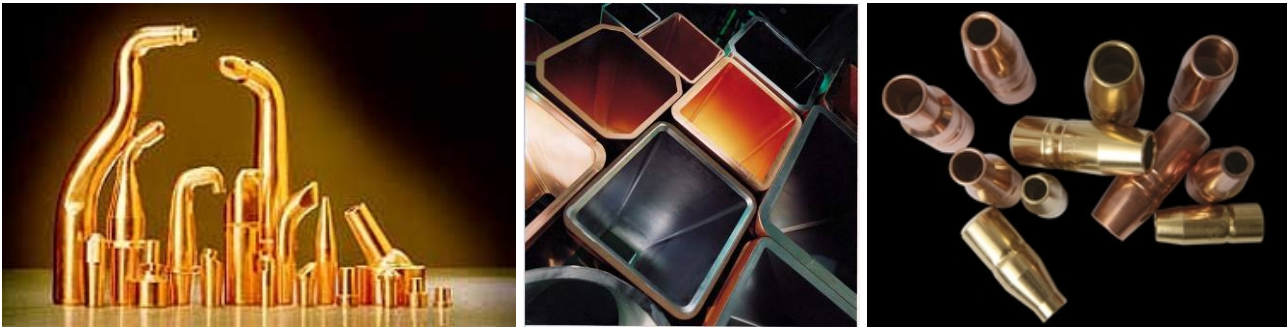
welding electrodes, moulds for continuous casting, nozzles for plastic presses
